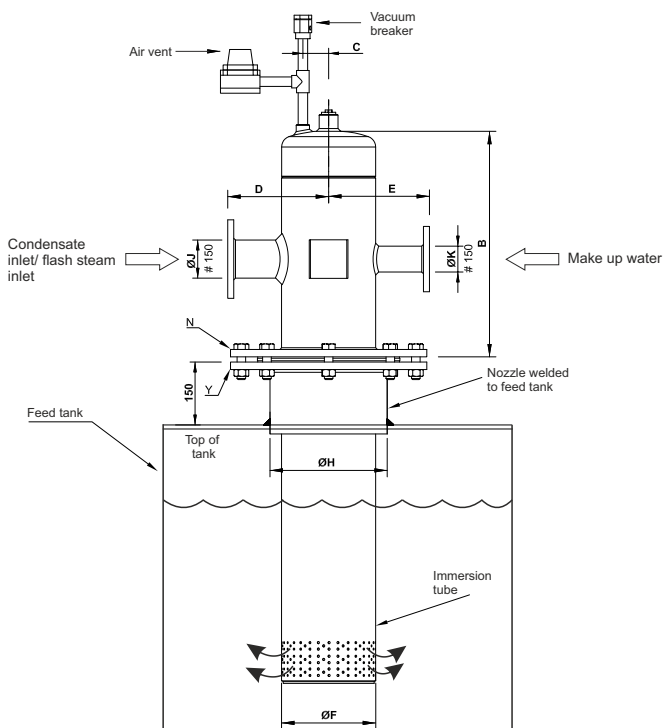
Dimensional Drawing of Forbes Marshall Deaerator Head
